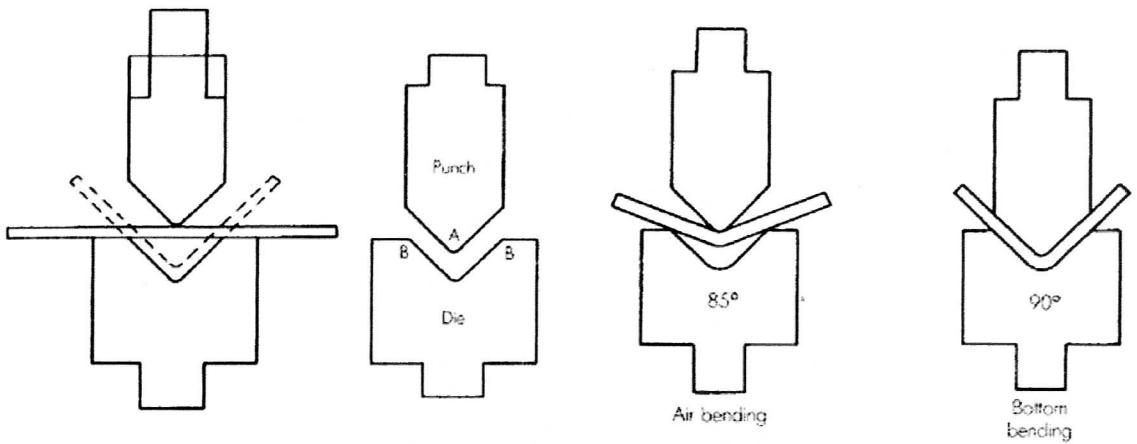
An example of air bending and bottoming, Wick C. et. al., Tool and Manufacturing Handbook Volume 2 (Forming), 4th Edition
